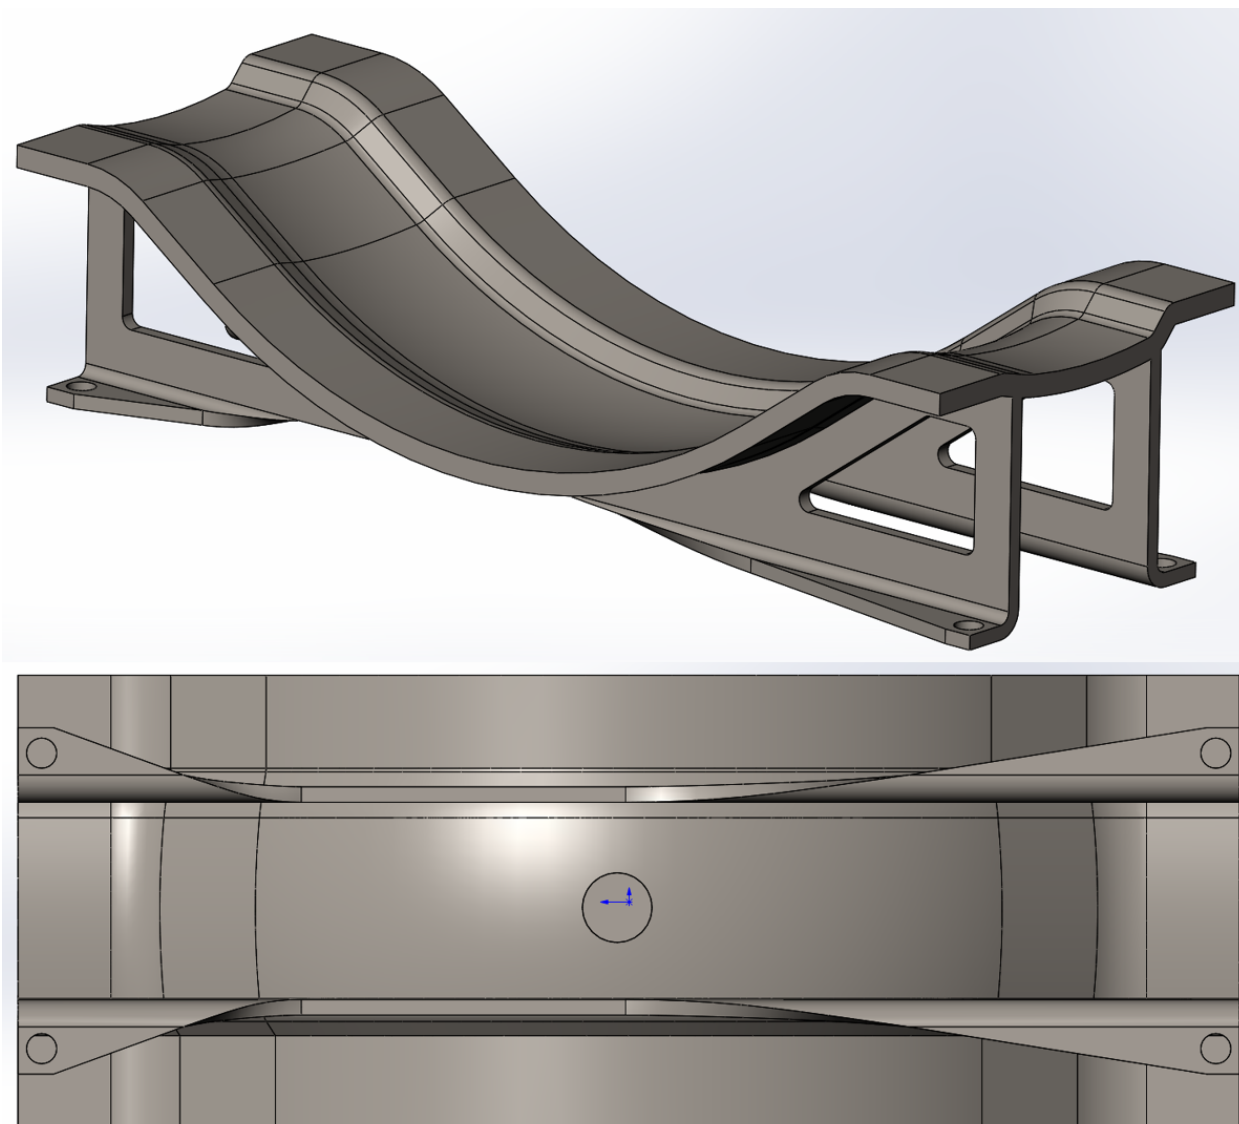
Final Design of the LA-100™ Demonstrator
